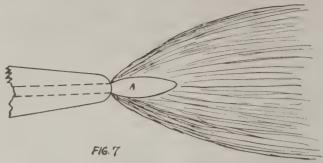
Neutral Flame for Welding and Brazing.
